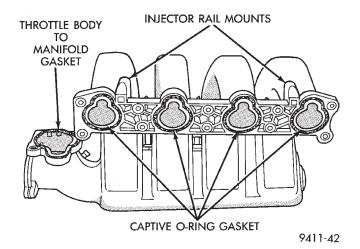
Intake Manifold O-Rings—2.0L Engine
